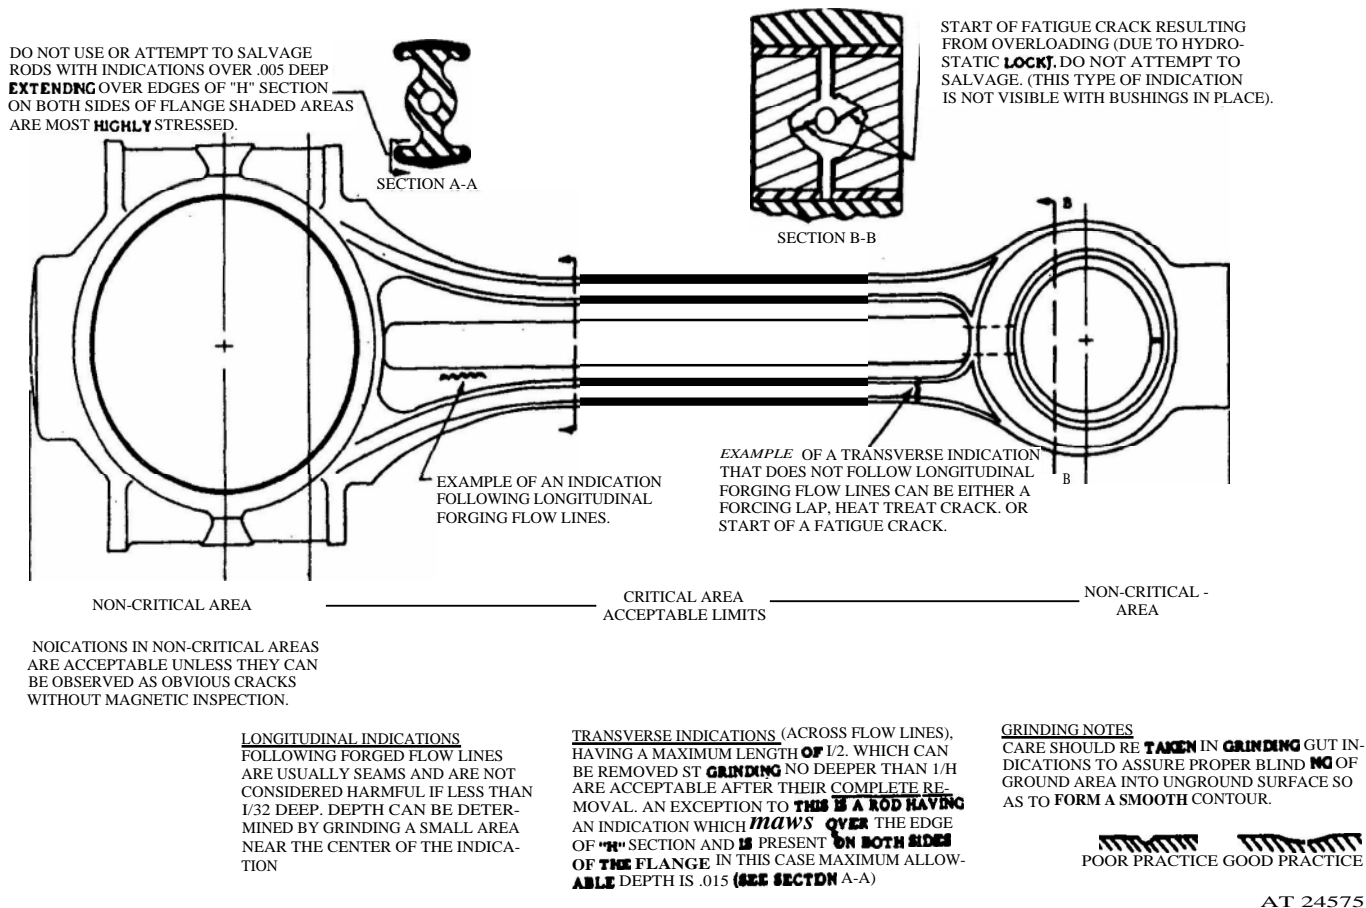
Magnetic particle inspection limits for connecting rod.
